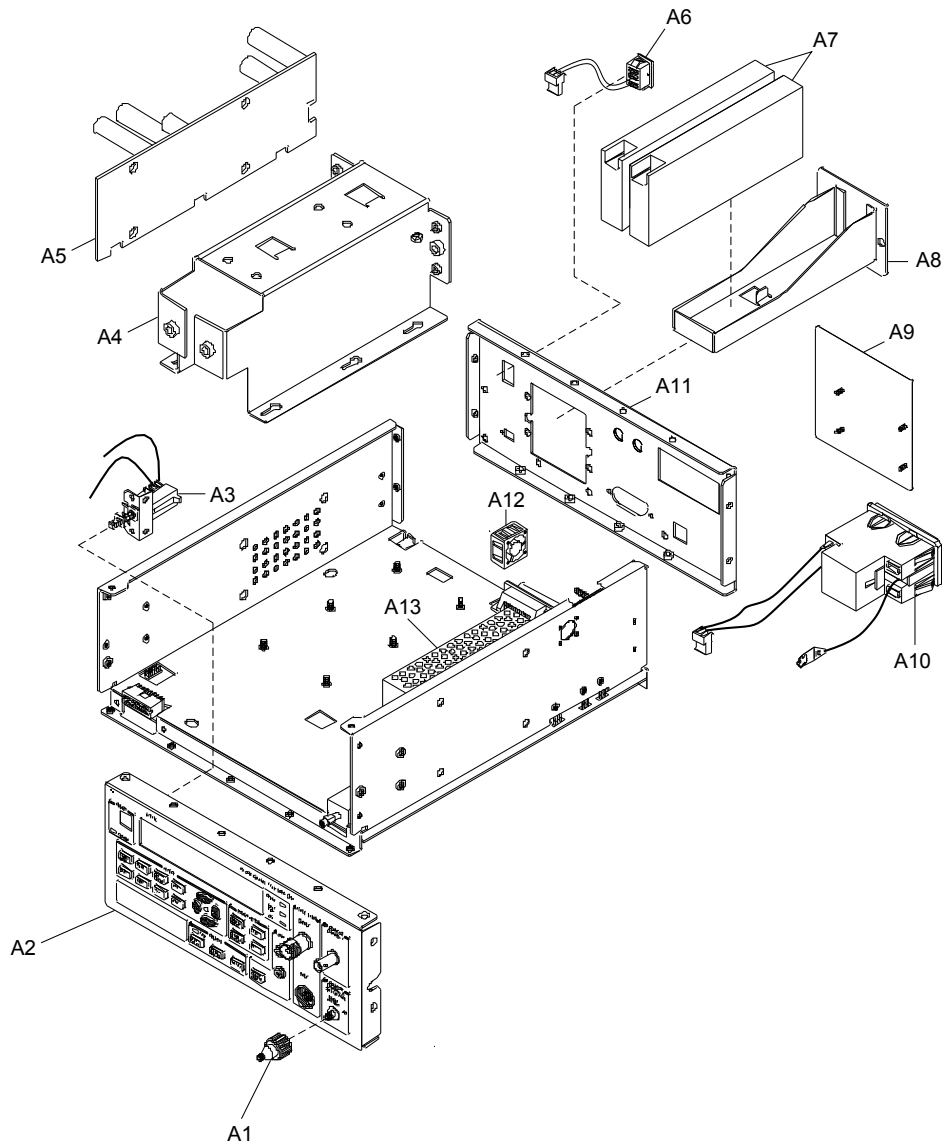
Replaceable Assembly Locations – Top Internal View
